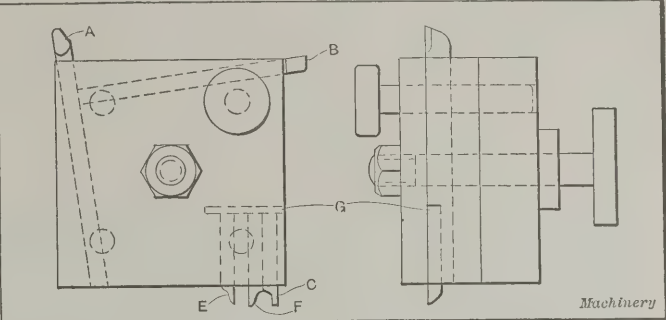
Turret Tool-post for Holding Turning and Cutting-off Tools
